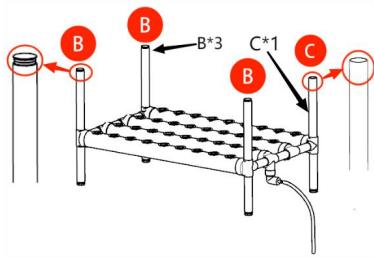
Connect three support tubes with letter B, one support tube with letter C, and the assembly of Figure 3 together according to the diagram. (Note that the support tube without a water plug should be placed in the bottom left corner)
